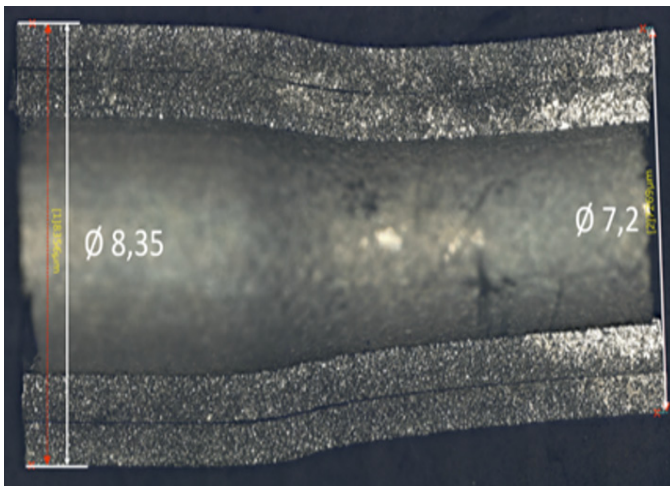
Forming zone of double-layered tube with \varnothing 8,35 mm while passing die hole \varnothing 7,2 mm
